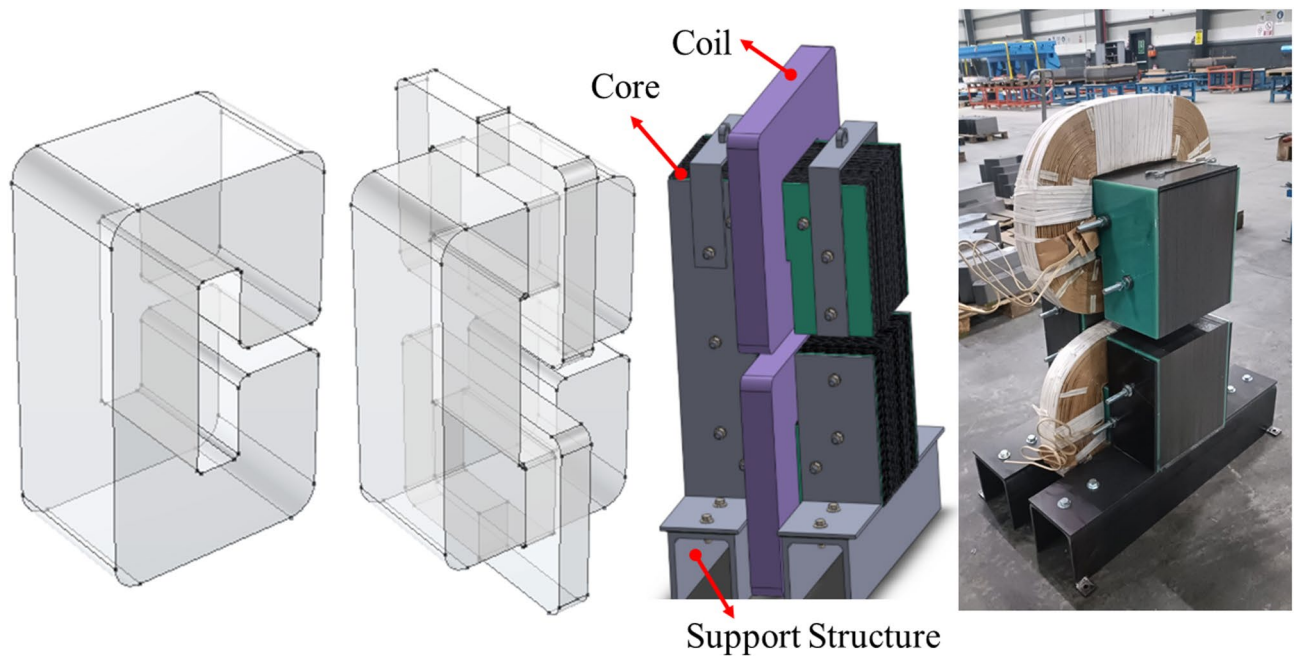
Technical layout of the C-type dipole dump magnet showing the core, coil assembly, and support structure.
